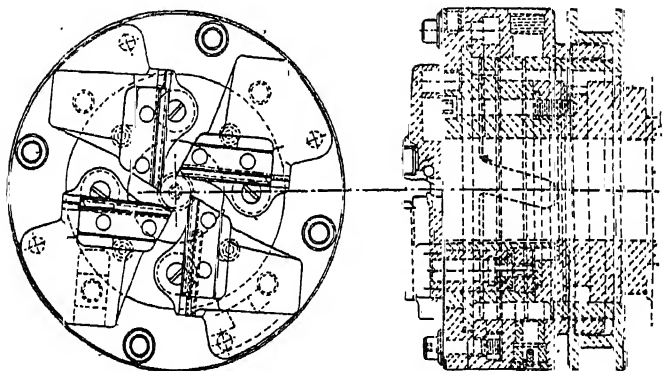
Tangential die-head of Kendall and Gent screwing machine.
